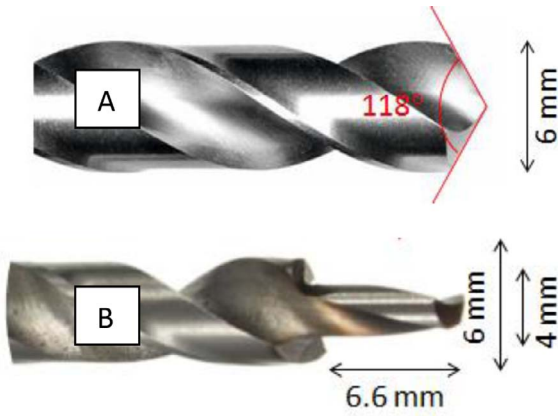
Main dimensions for both tools testes: twist (A) and step (B).
